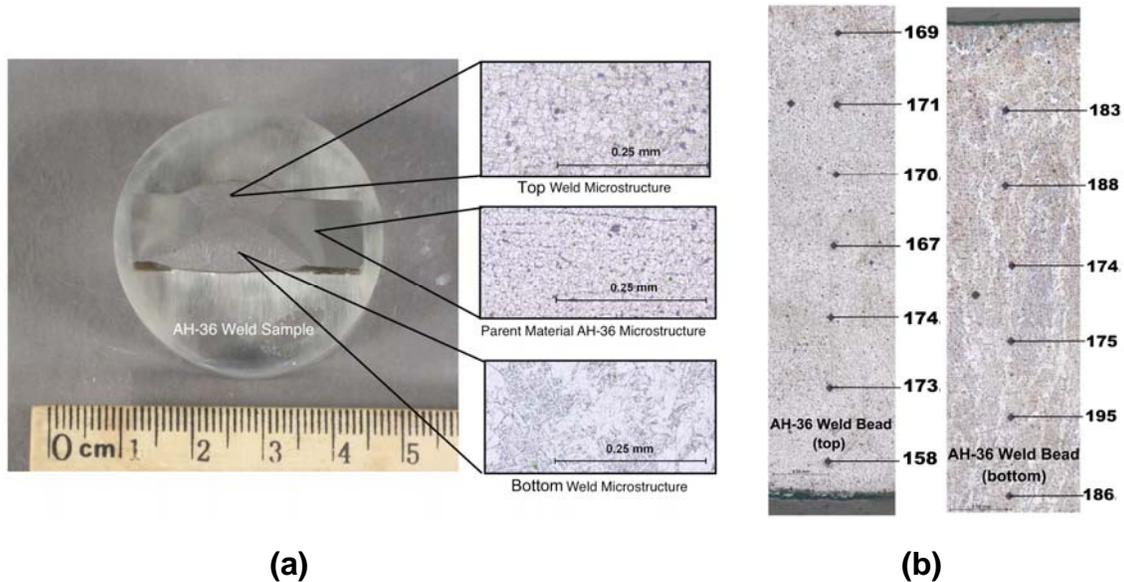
AH-36 weld specimen (a) Cross-section of metallographically prepared specimen illustrating top weld bead, base metal (parent material), and bottom weld bead, and (b) Vickers microhardness measurements of top and bottom weld beads.
